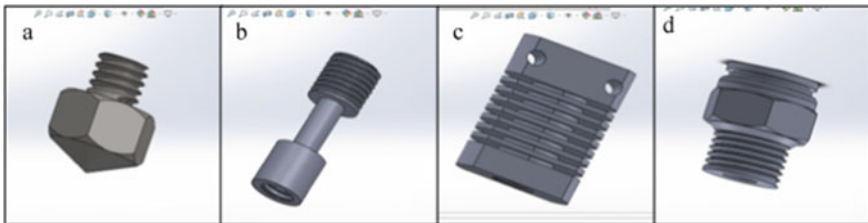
CAD Model of a nozzle, b throat, c radiator and d fitting nut
